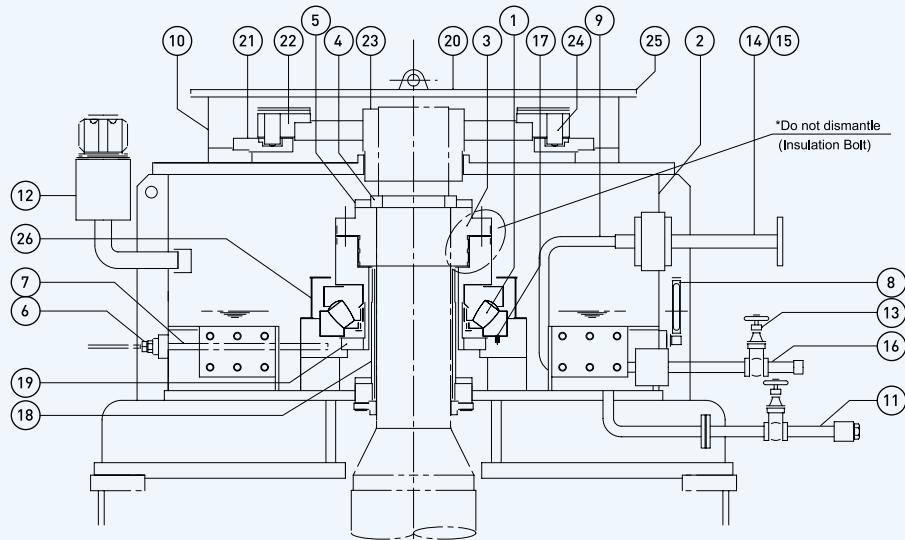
Replacement Procedure for Upper Bearing(Upper Bearing Assembly Drawing)
